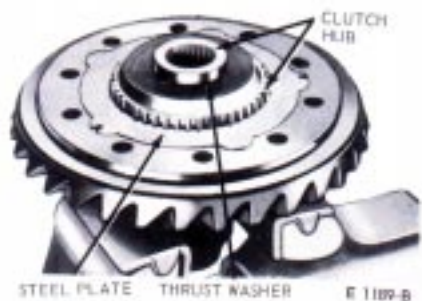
Installing Steel Clutch Plates and Friction Plates
